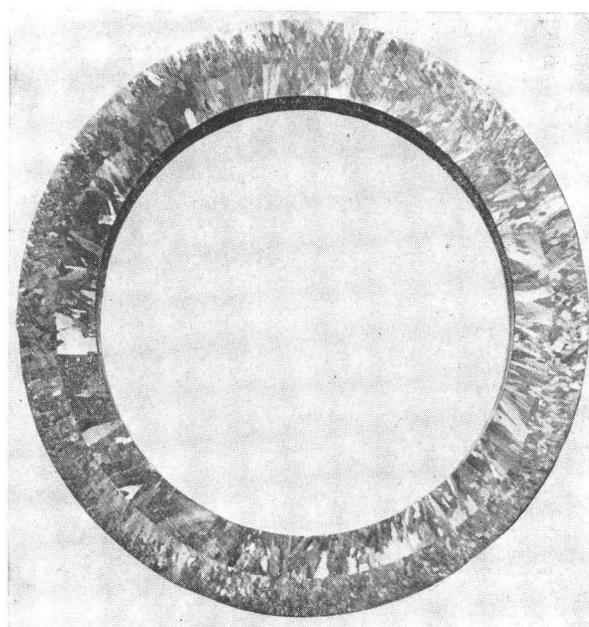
Macro section of HK40 « Weld-Formed » tube.
